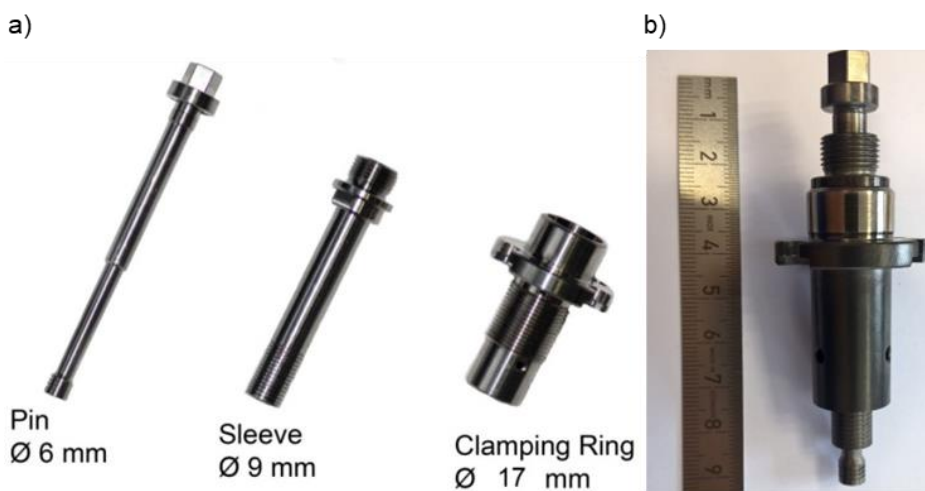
a) Tools elements and b) tool concentric attachment configuration.
